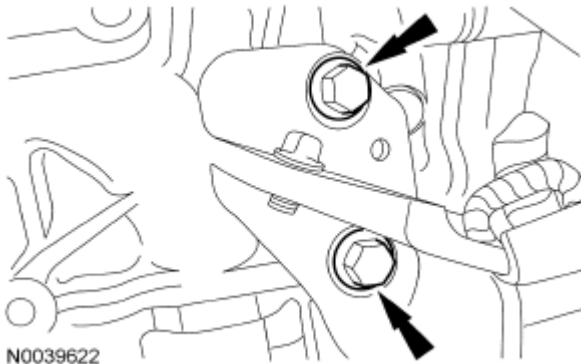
Locating RH Halfshaft Carrier Bearing Bracket Bolts
